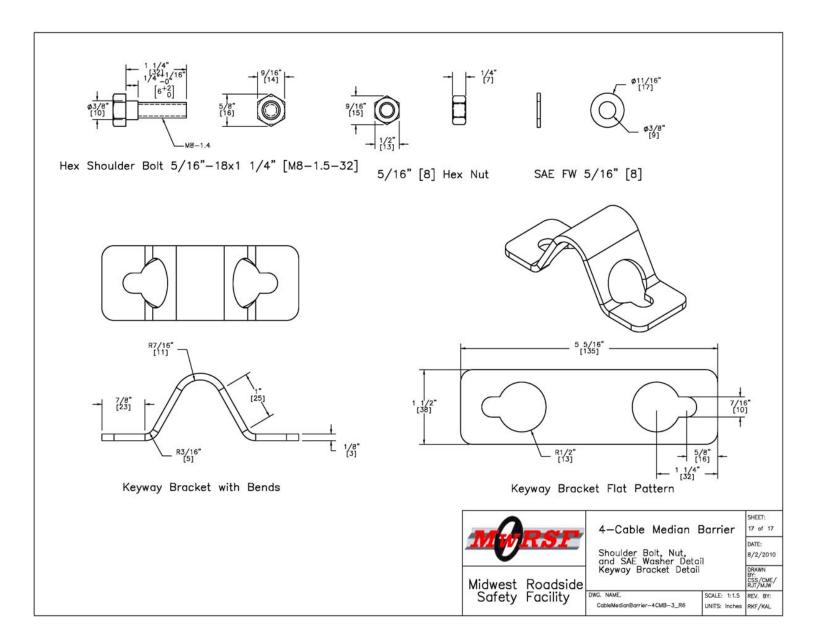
Shoulder Bolt, Nut, Washer, and Keyway Bracket Detail, Test No. 4CMB-3
